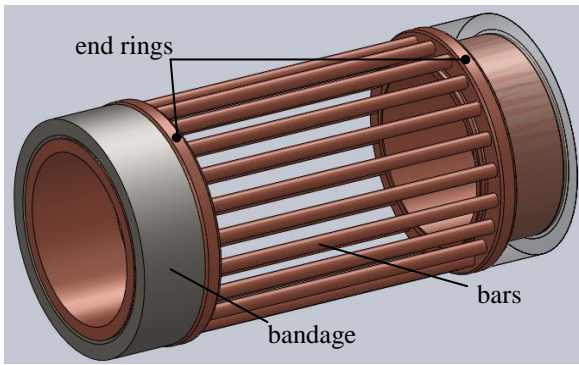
The rotor structure of an induction machine. A copper cage assembly with copper bars $d = 8 \text{ mm}$ (22 pcs), end rings and bandages.
